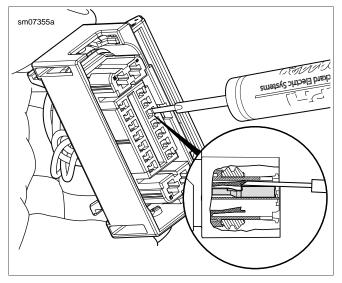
Removing Small Socket Terminal: Tyco MCP Connector
